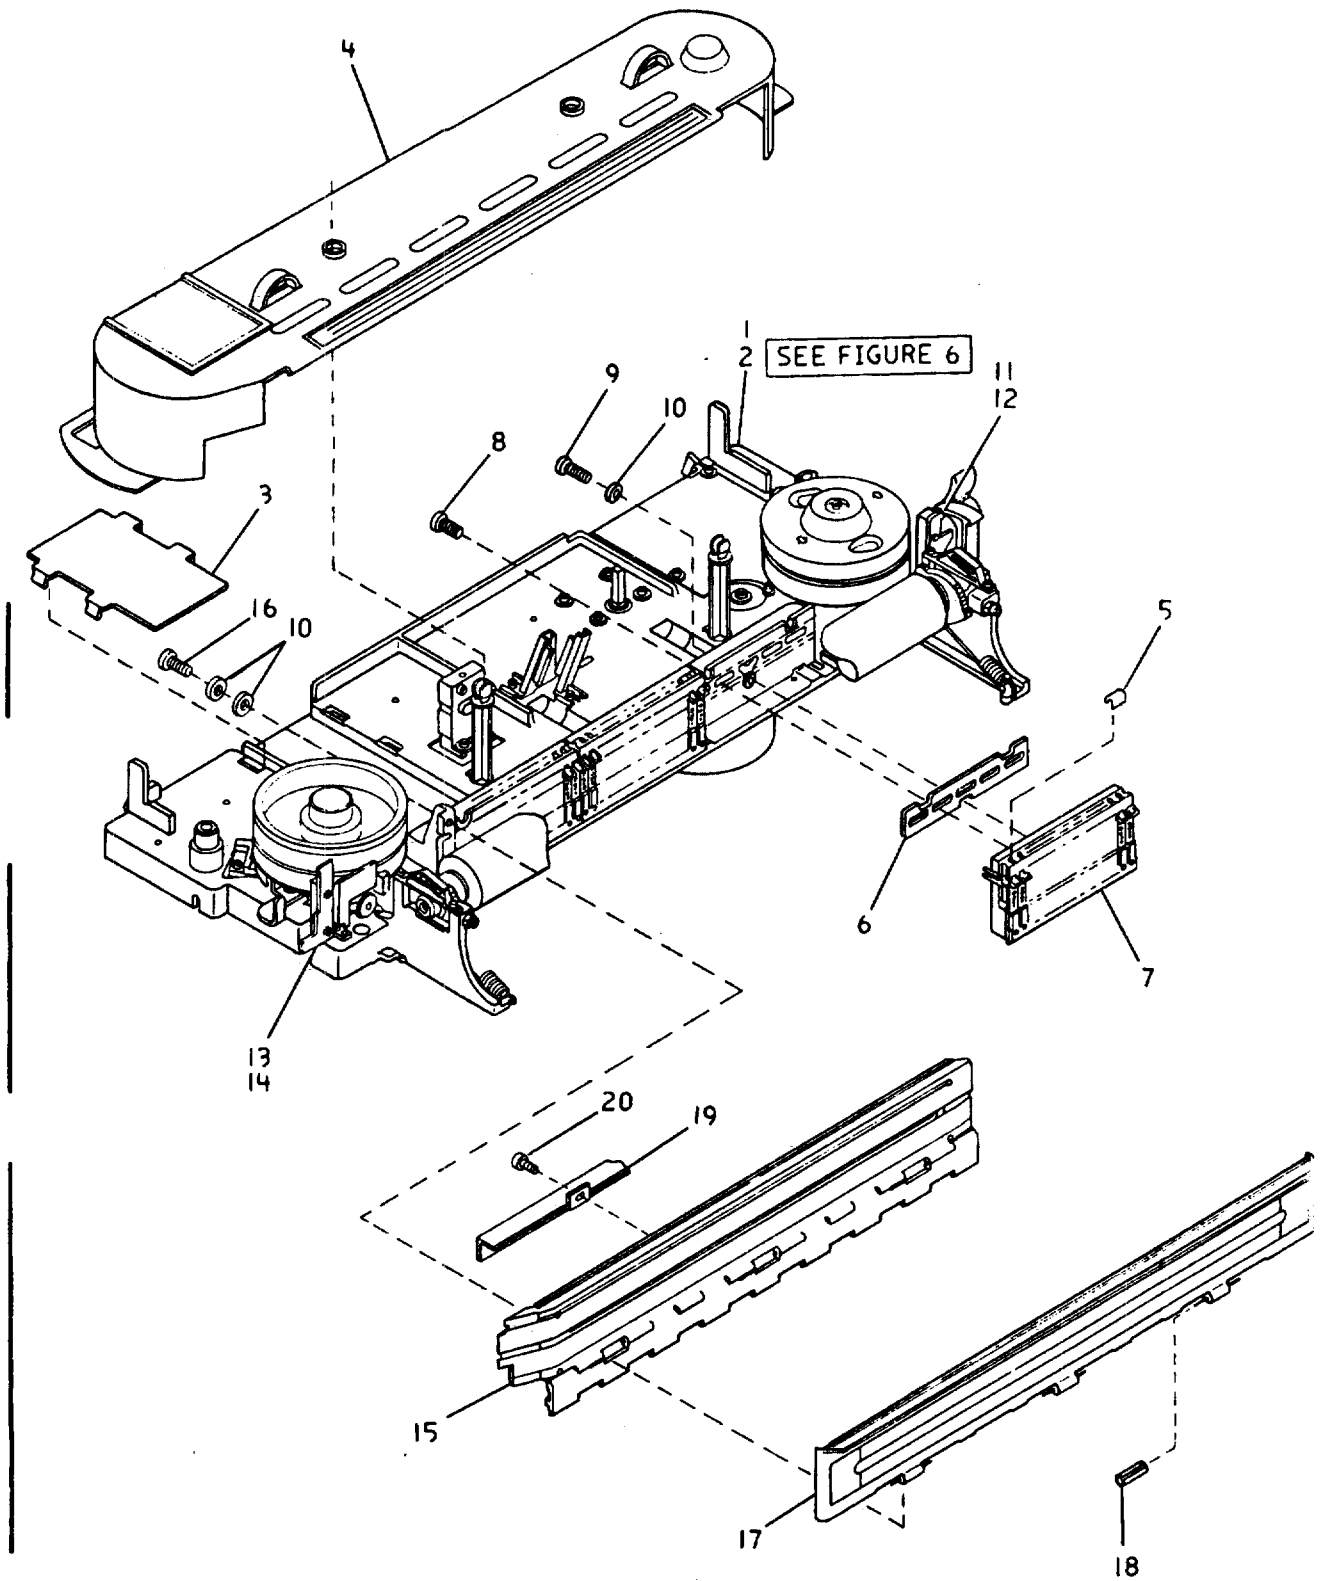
INTERMEDIATE PRINTER MECHANISM (IPM)
